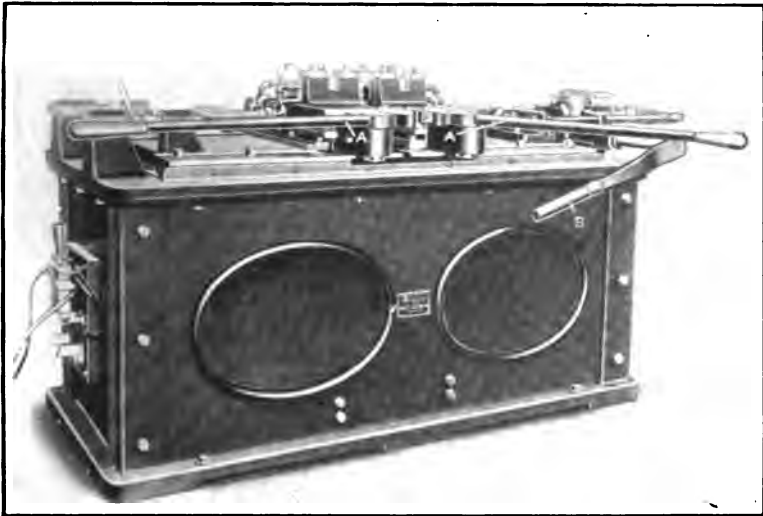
Chain-welding Machine designed and built by the Thomson Electric Welding Co.
